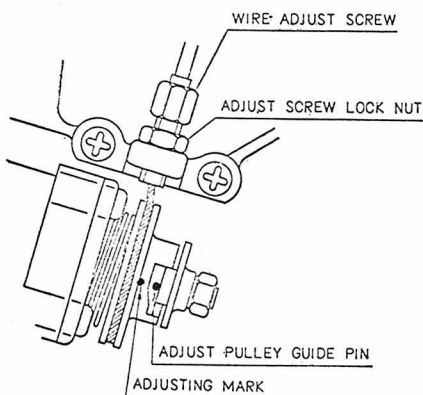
The adjusting mark and guide pin should be aligned as shown when throttle is half open.
